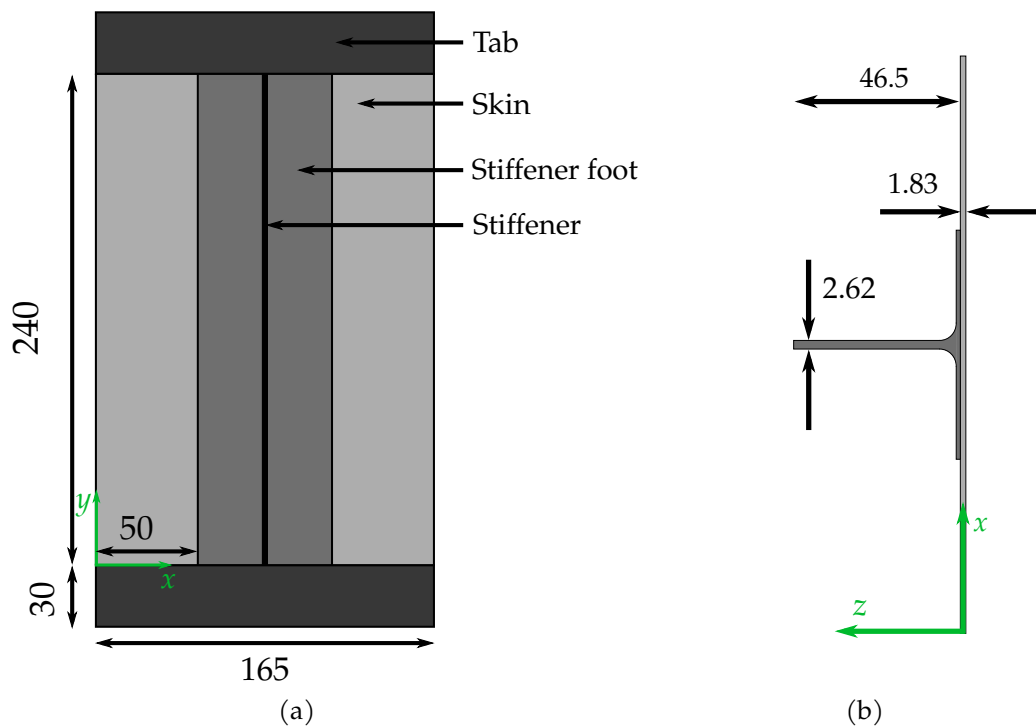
Geometric properties of L1 coupons: front view (a) and cut view (b). All dimensions are in mm.
